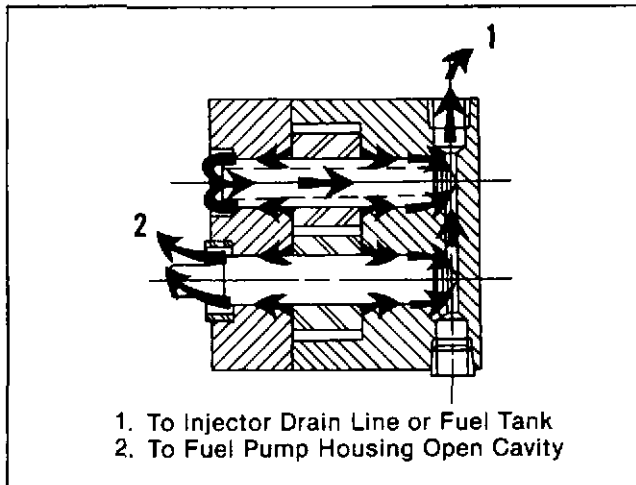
, (F5157). Gear pump cooling and lubricating fuel flow.
